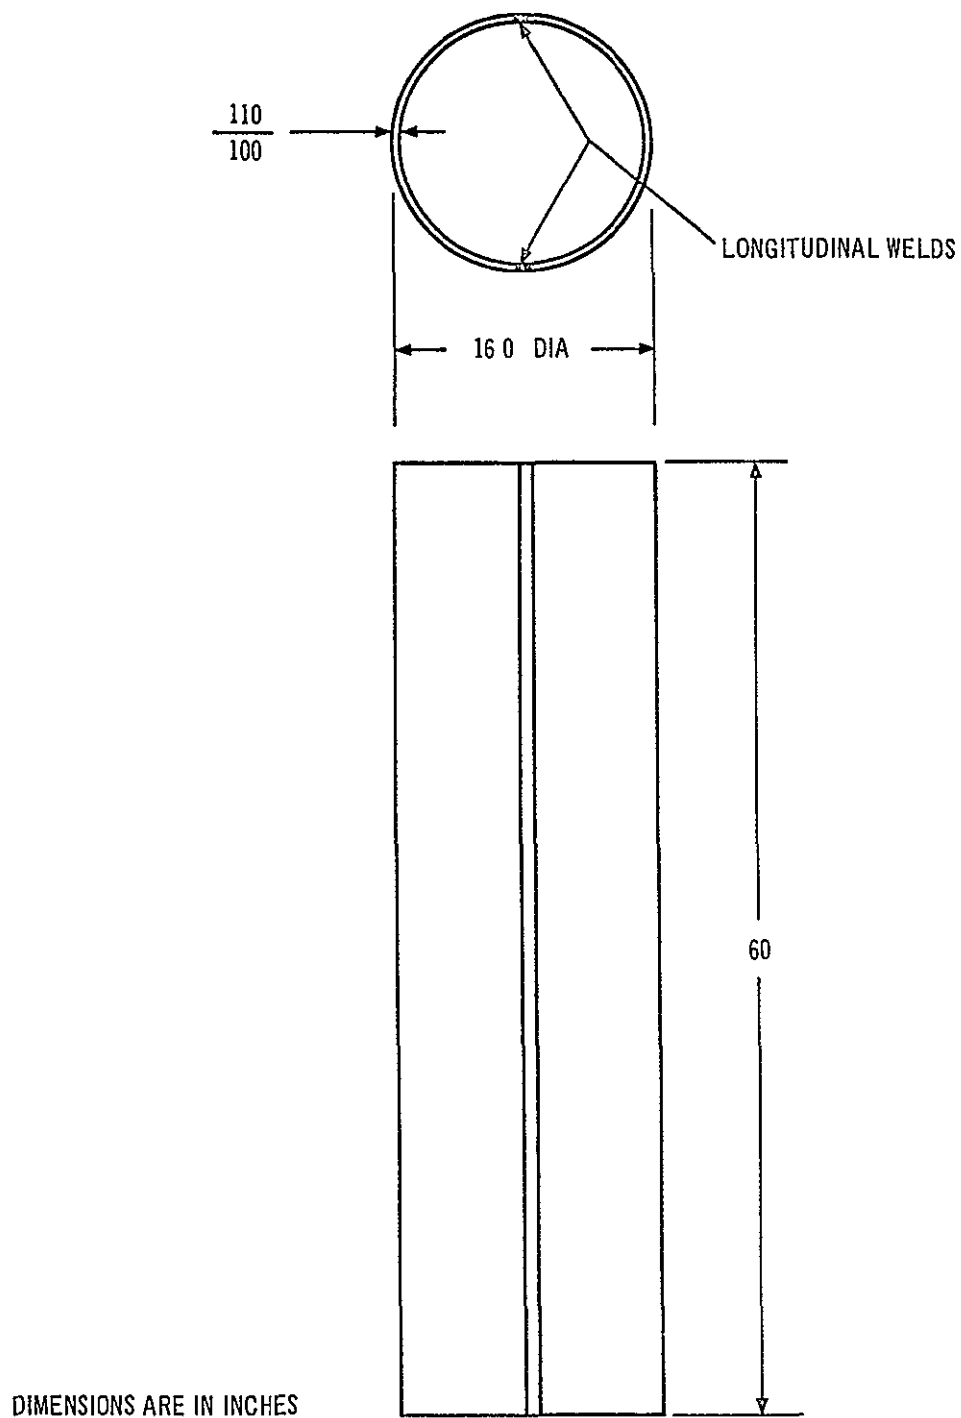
Welded Biaxial Test Cylinder Dimensions
